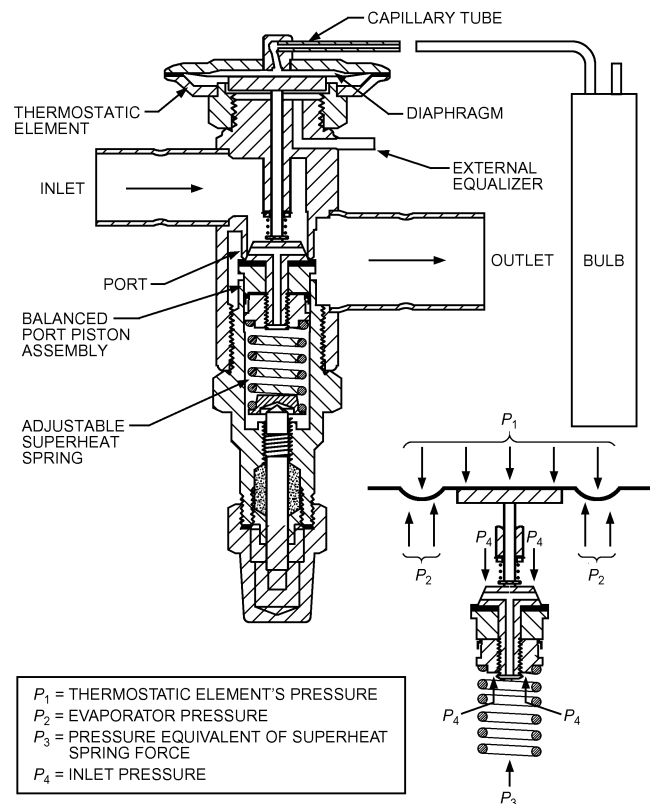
Typical Balanced Port Thermostatic Expansion Valve
